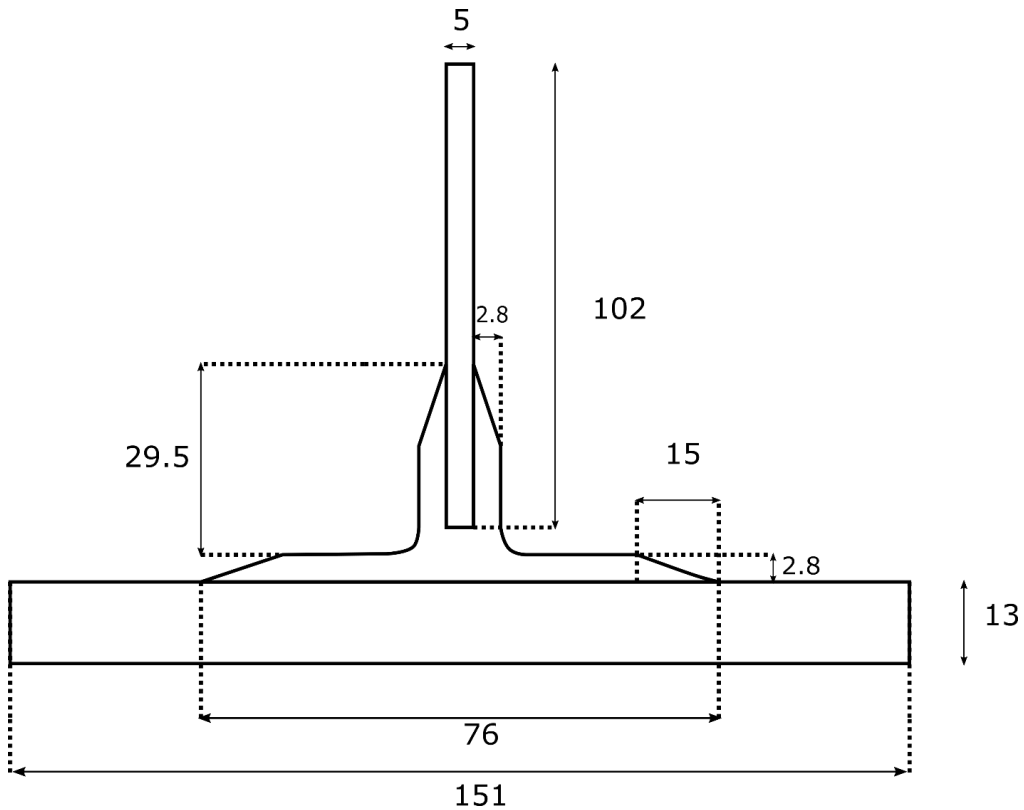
Drawing schematics of pi-joints specimens. Dimensions in mm (10^{-3} m). Not to scale.
